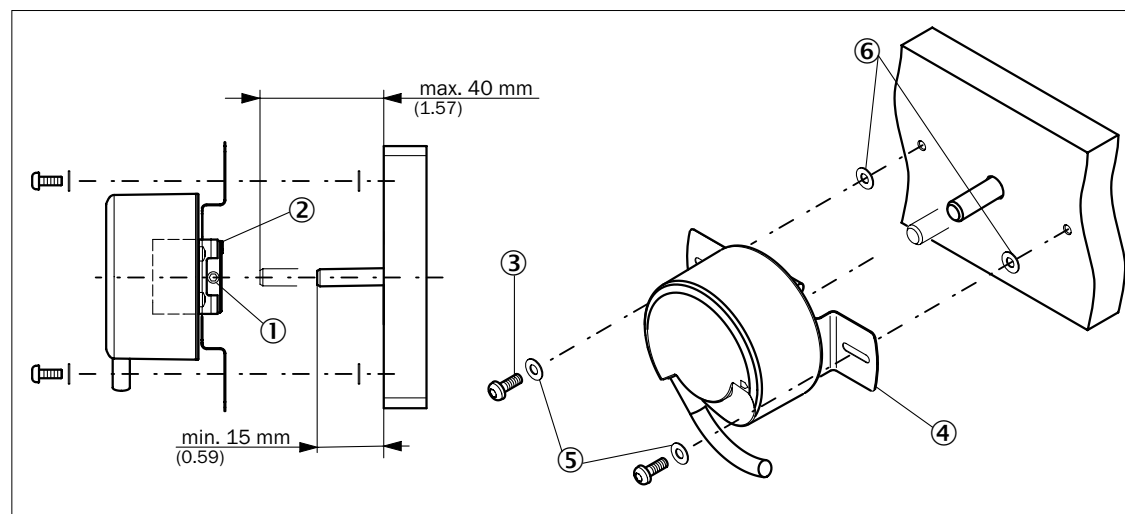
Mounting through hollow shaft with stator coupling 0, B, D, E, G (clamping at the front)
